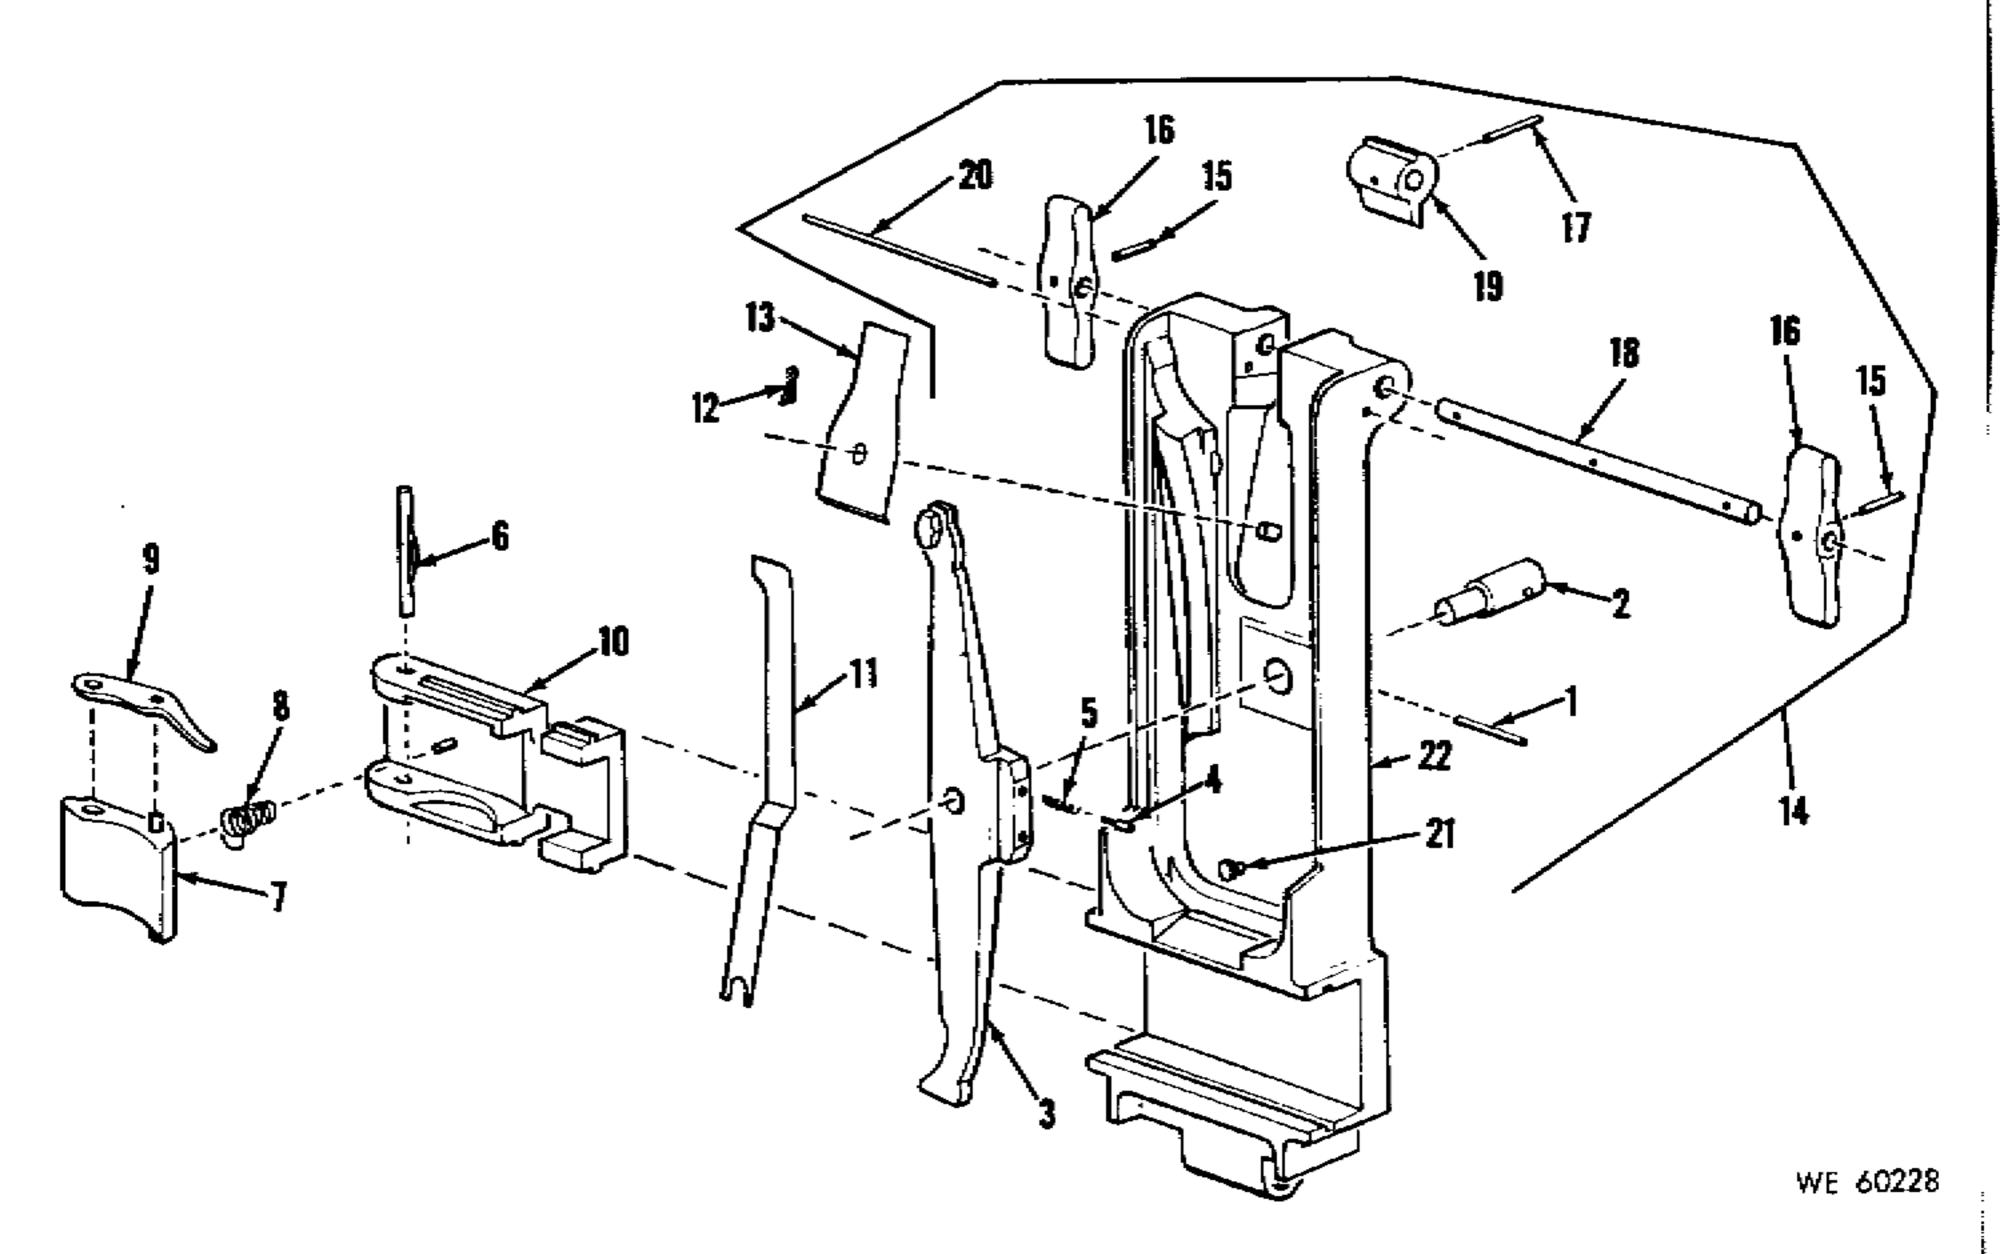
Cover group for Caliber 30 Machine Gun, M37 only—exploded view.
